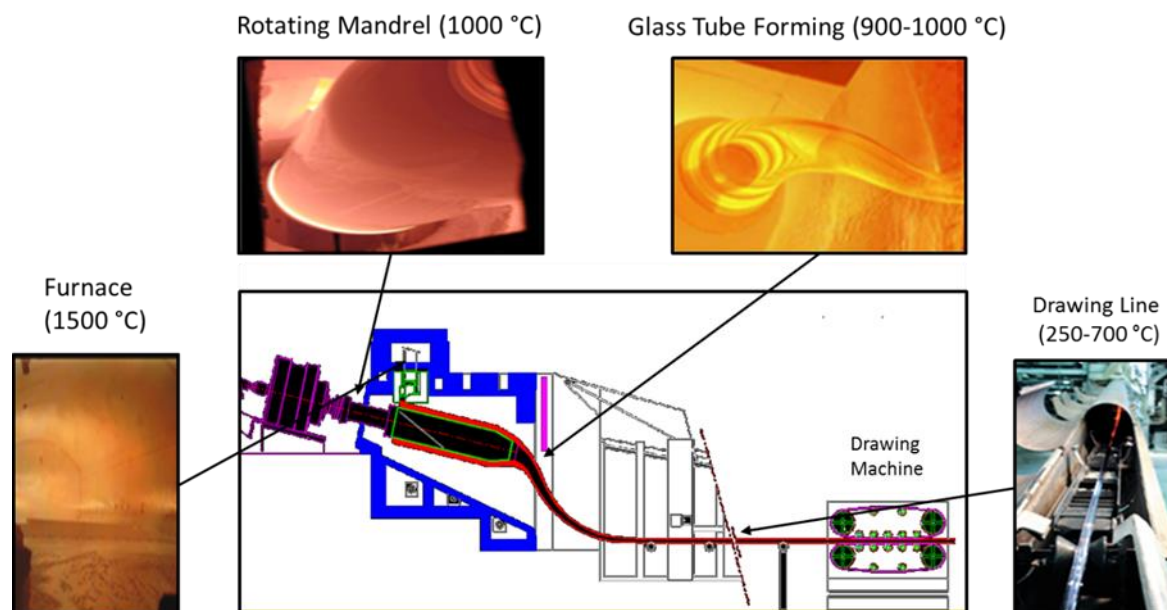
A scheme depicting the process of glass tube formation. A Cutting and Discarding Machine is located after the Drawing Machine (not shown in the figure).
